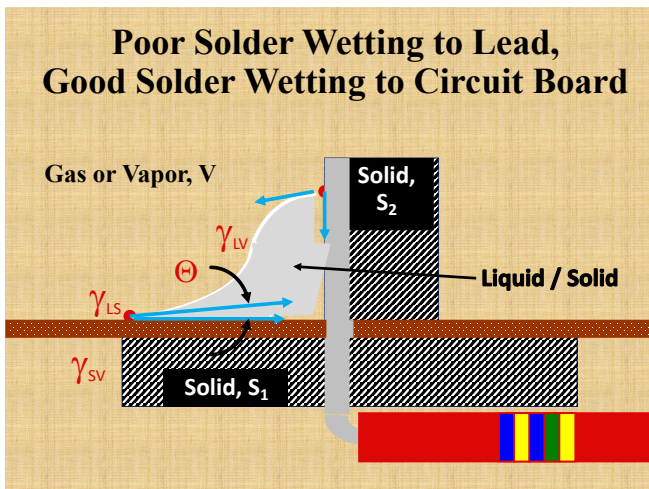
Liquid in Contact with Two Solid Surfaces – Good Wetting Angle to PCB, Poor Wetting Angle to Component Lead
